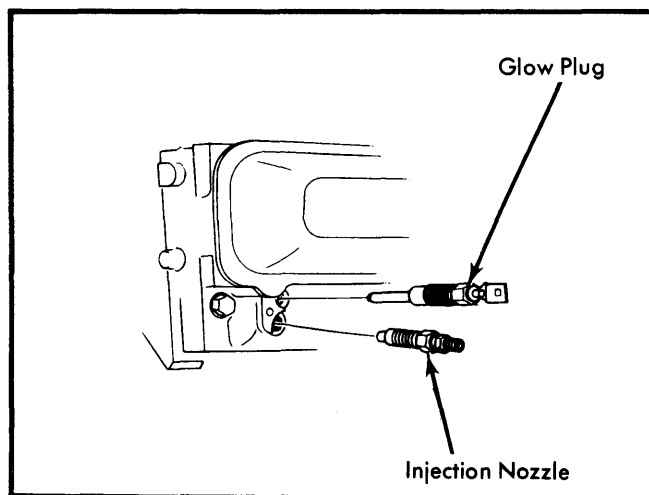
Diesel Glow Plug & Injection Nozzle Location
